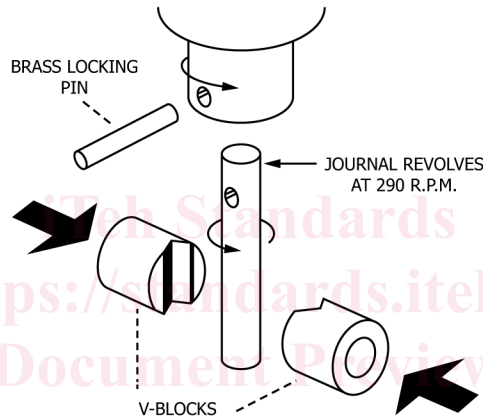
Exploded View of V-Blocks and Journal Arrangement, Falex Pin and Vee Block Lubricant Test Machine
